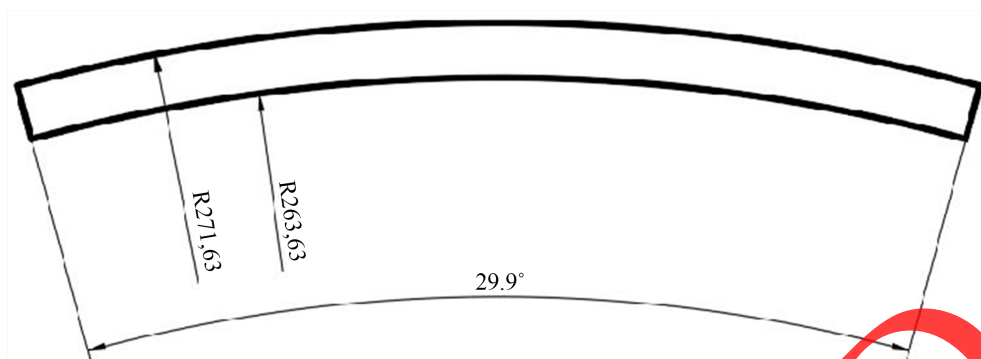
Dimension drawing of wire-cutting Pb-Sn alloy sample (unit: mm)
